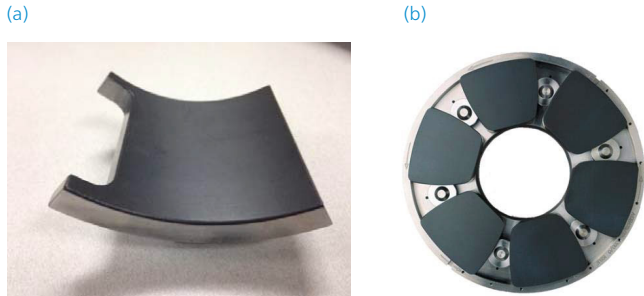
PEEK-based (a) journal bearing pad and (b) thrust bearing (Reference: Jie Zhou, "Temperature Monitoring of PEEK Bearings", Society of Tribologists and Lubrication Engineers Conference, Las Vegas, May 15-19, 2016.)
